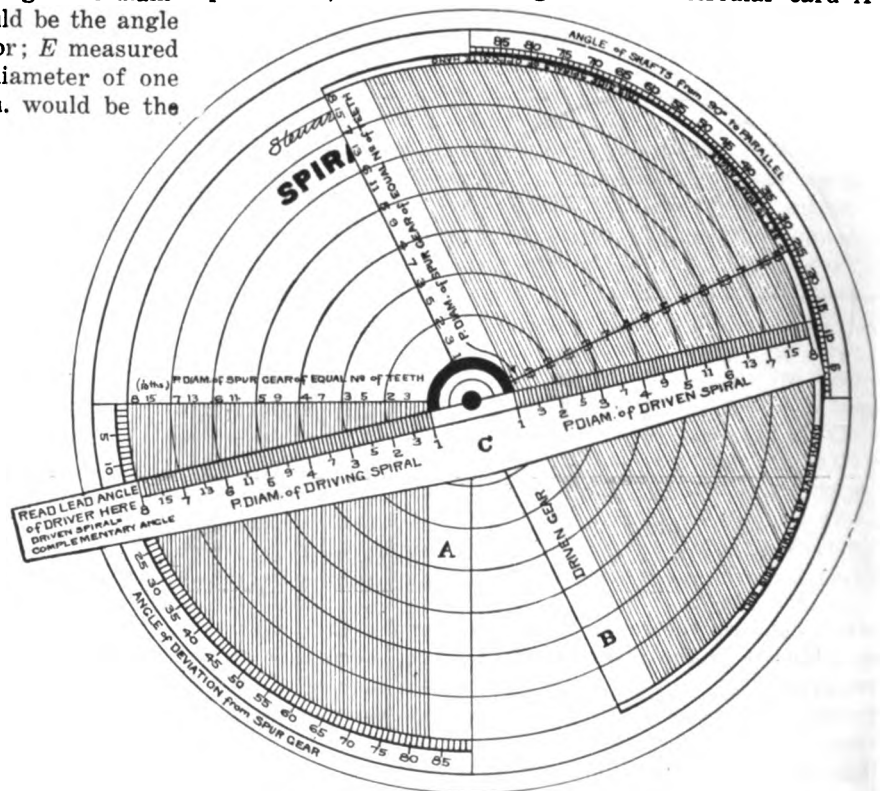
THE "SPIRAL" GEAR PROTRACTOR
